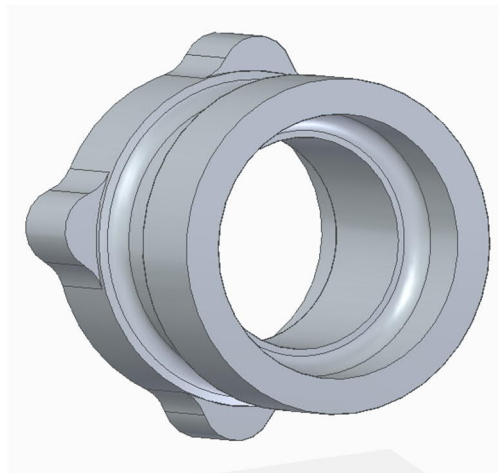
Casting 1, roller, with feeding paddings. The final part is without the protrusions on the back half of the part.
